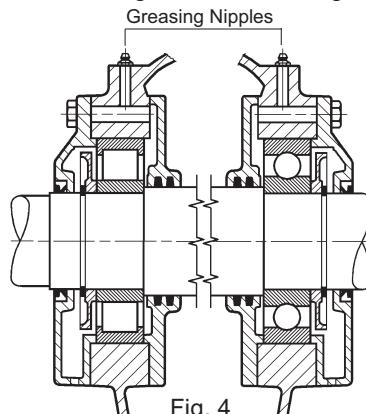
D.End : Cylindrical Roller Bearing N.D.End : Fixed Ball-Bearing
